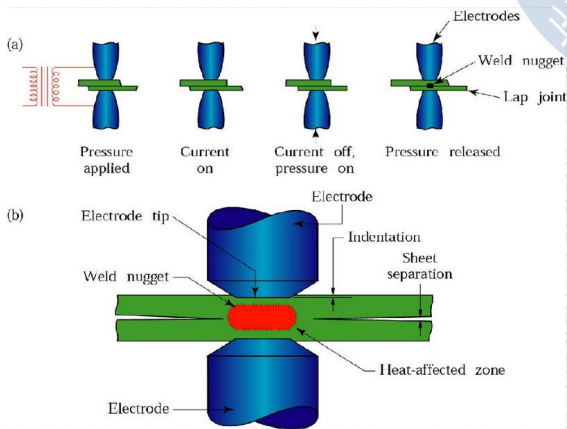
(a) Sequence in resistance spot welding. (b) Cross-section of a spot weld, showing the weld nugget and the indentation of the electrode on the sheet surfaces. [13]
